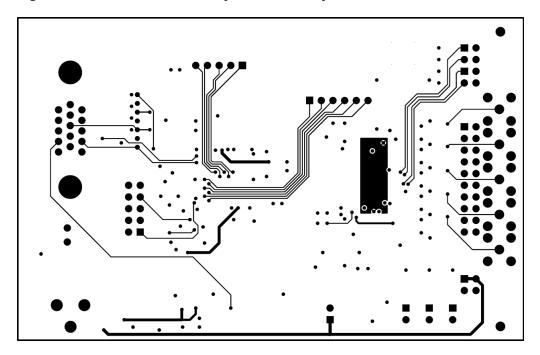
GPX2-EVA BOARD Layout: Assembly layer
